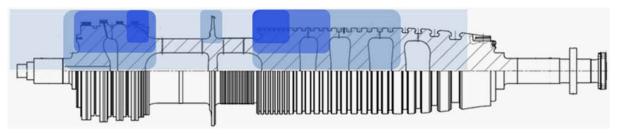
F-Class ALSTOM welded rotor / @ALSTOM
